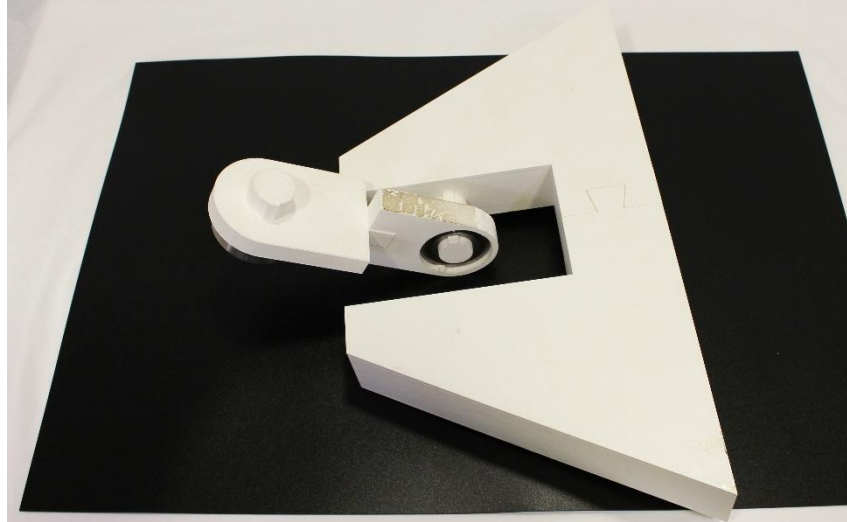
Yaw rotation check of Dual Axis one way bearing systems- mark 3-assembly type 1
